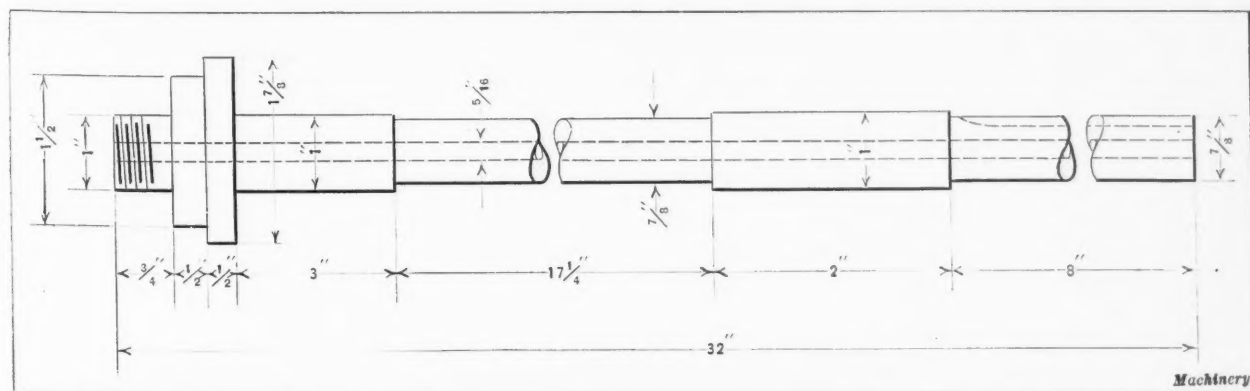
Spindle in which a Deep Hole was drilled in the Lathe
